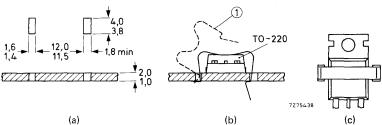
(a) Heatsink requirements; (b) mounting (1 = spring clip); (c) position of the device (top view).
